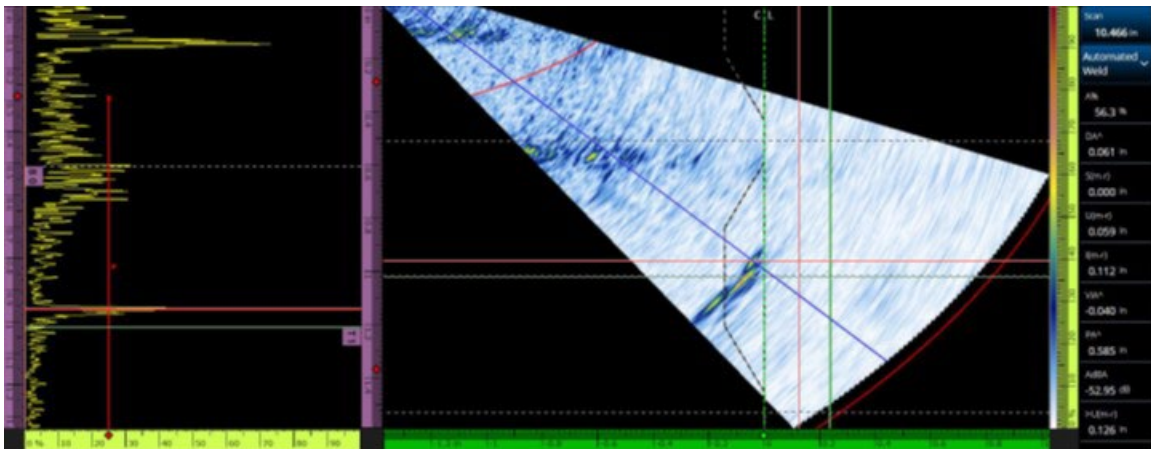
PAUT indication of defect at Location A in fillet weld test panel MGL-3 from OD-raster scan
